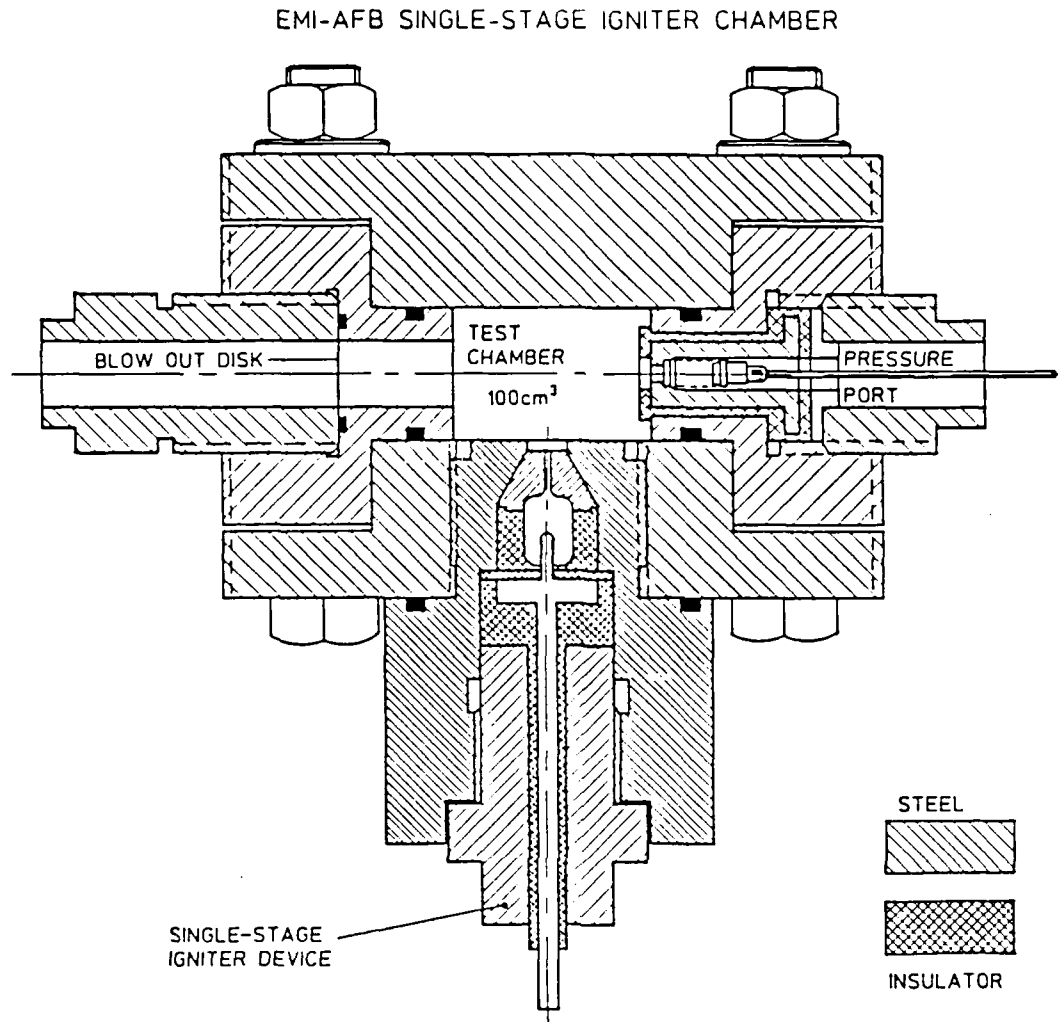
Modified EMI-AFB ignition test fixture with electrically insulated pressure transducers.
